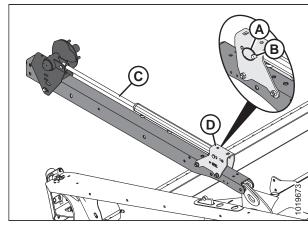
Left Reel Arm Cylinder in Forward Position
